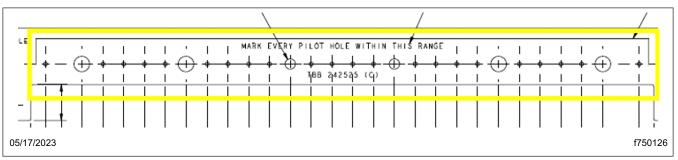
, Region Showing all Pilot Holes to be Marked, Fixture C
